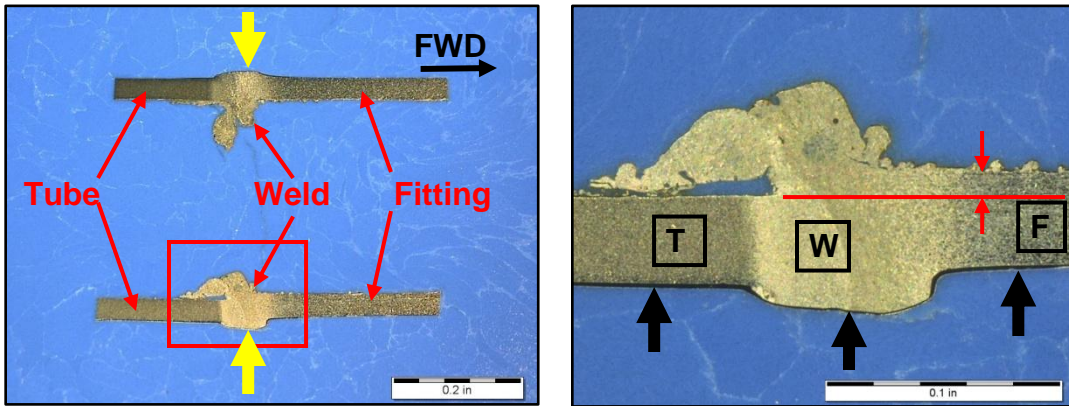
Sectional view of the link along the red dashed line in Figure 56 (left) and a closer view of the weld in the red box (right).
